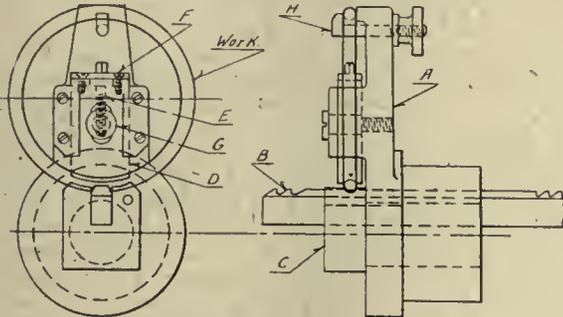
FIXTURE FOR BROACHING SLOT IN RING.
